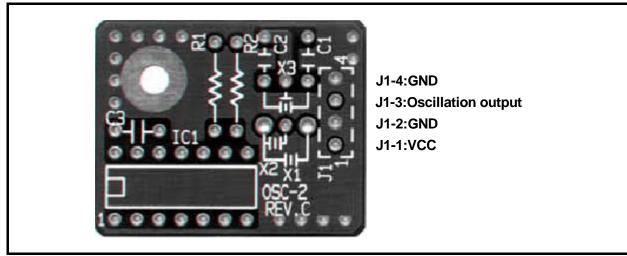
External view of the OSC-2 oscillator circuit board and its connector pin positions
